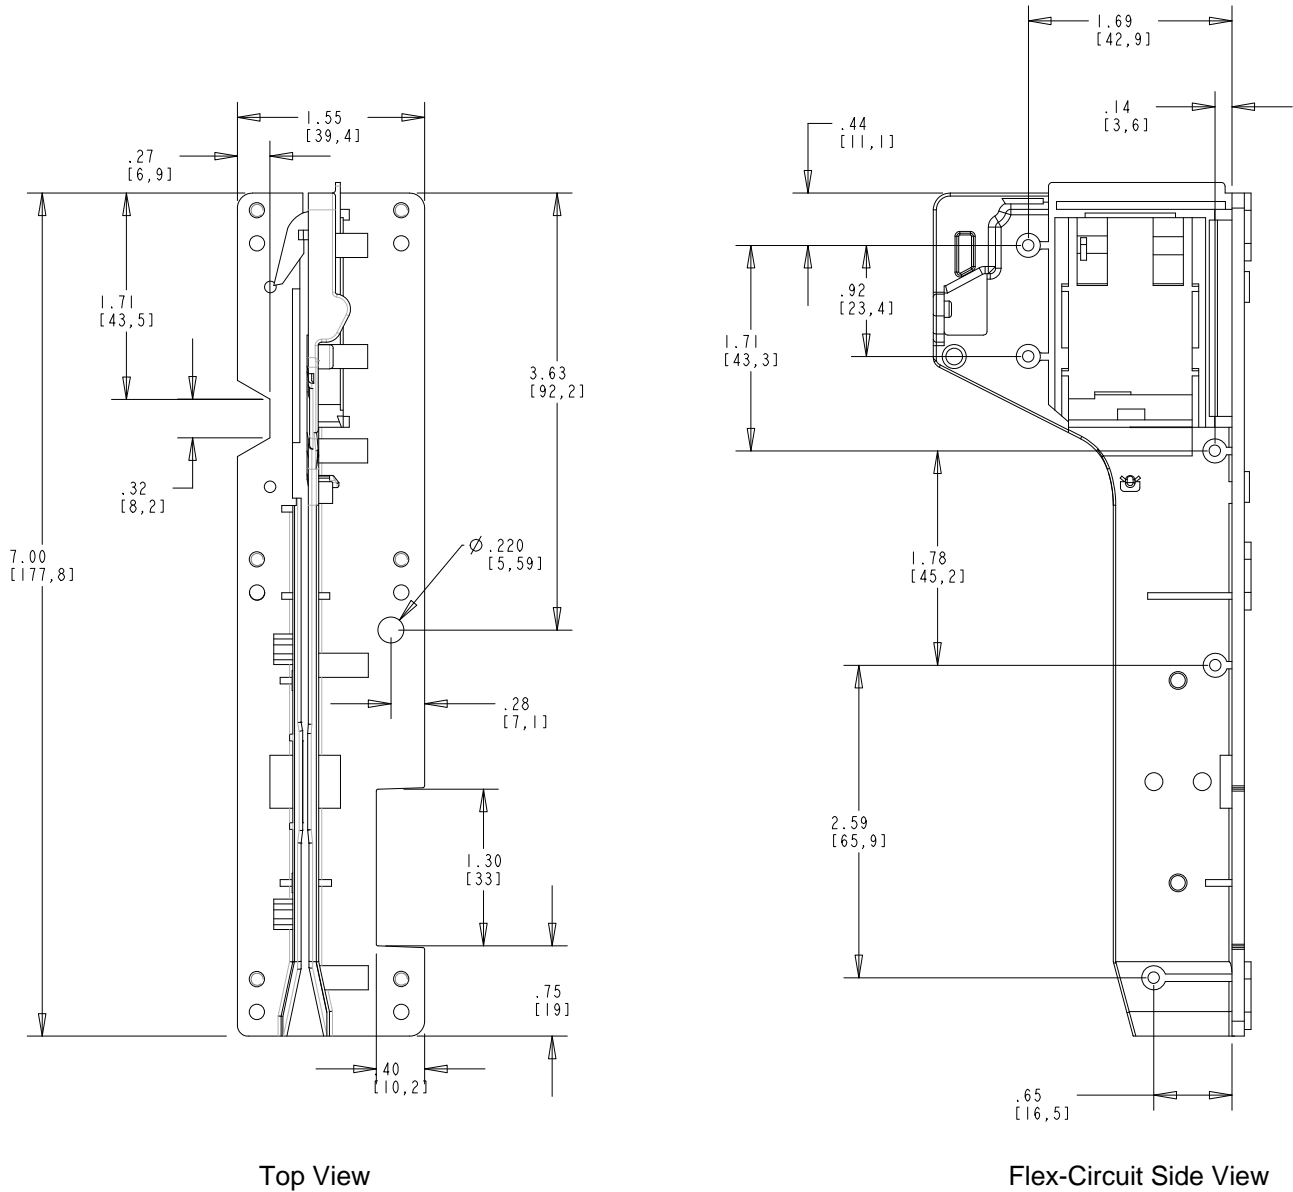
Swipe & Park – Top View and Flex-Circuit Side View
